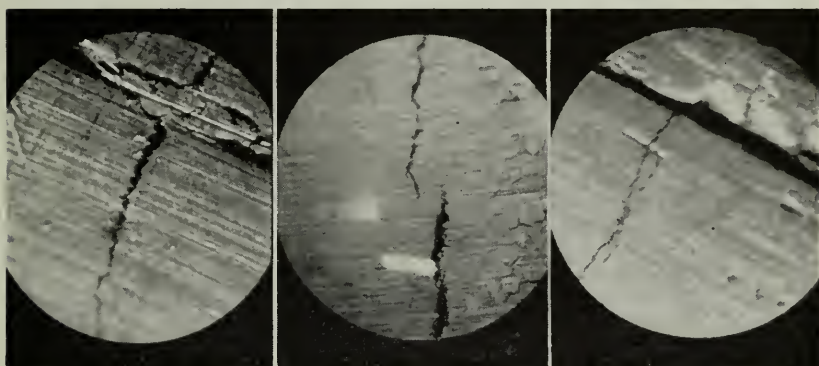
Embrittlement defects from Boilers Nos. 1, 2 and 3 (from left to right) as seen in rivet holes through the Hartford Steam Boiler magniscope.
